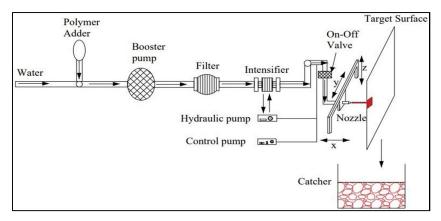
Schematic Diagram of Abrasive Jet Machining (AWJ)
